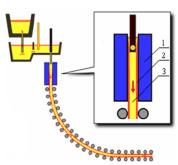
The continuous casting machine and the mold [1]: 1 – mold; 2 – solidified metal; 3 – liquid metal
